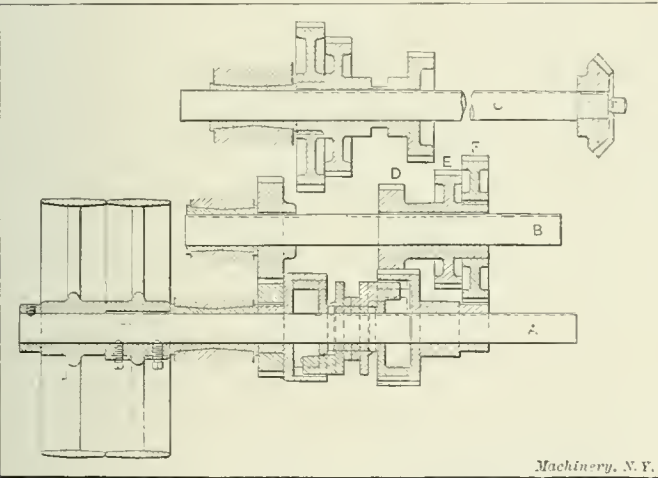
Arrangement of Gears in Gear-box shown in Fig. 2
